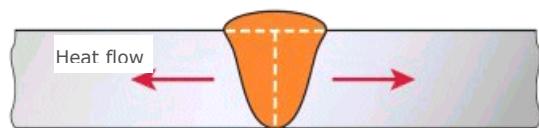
HAZ on the weld metal and parent metal.
